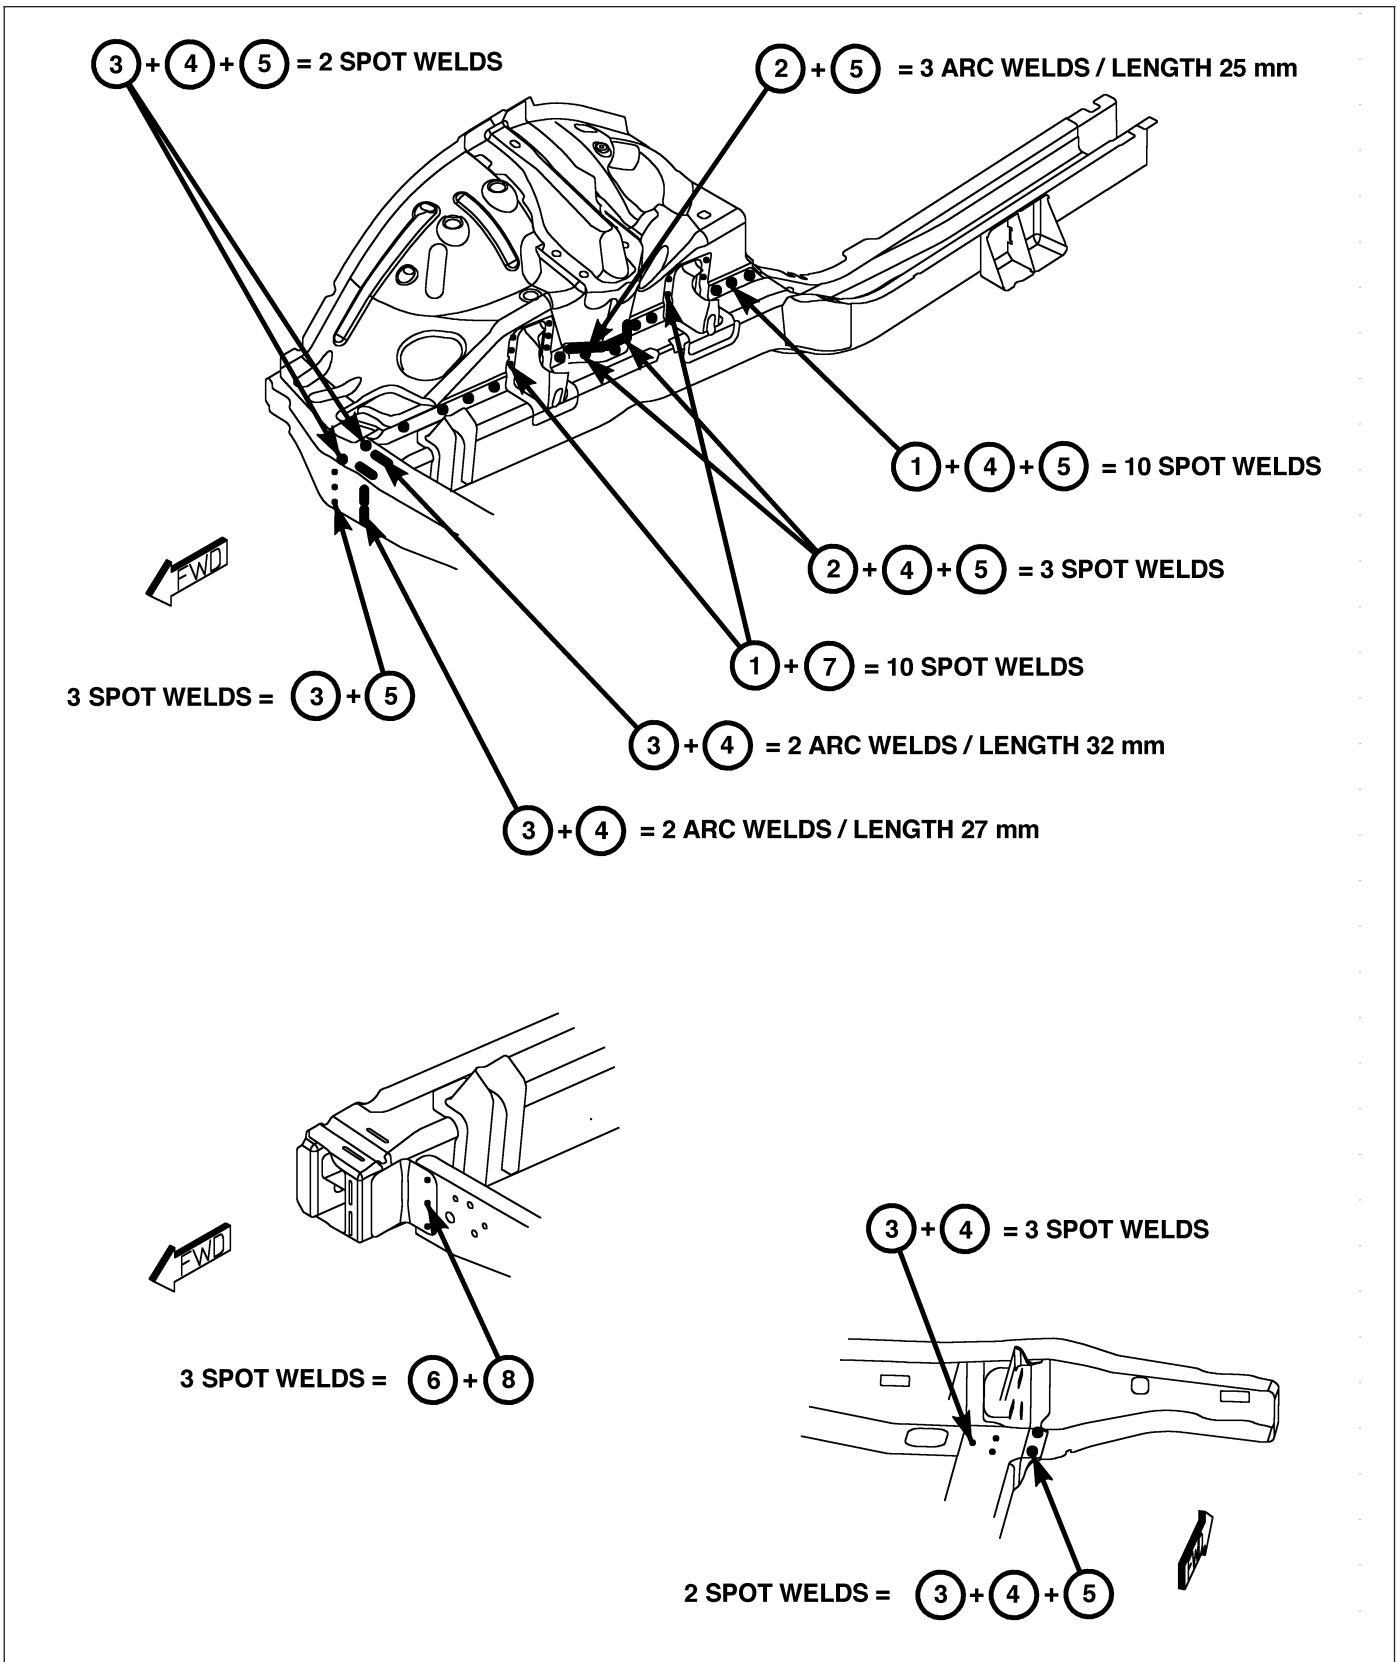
INNER FRONT WHEELHOUSE/FRONT INNER RAIL
